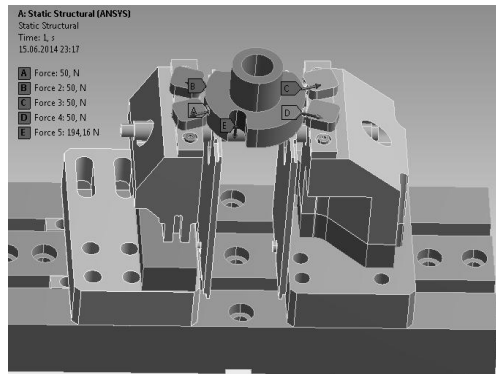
Experimental setup for cylindrical workpiece – Case II.
